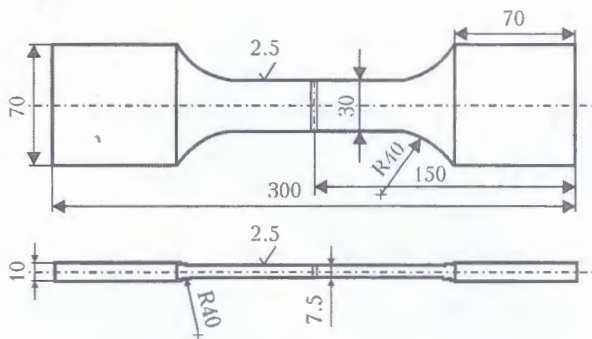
Sketch of specimen for fatigue test of welded joints
